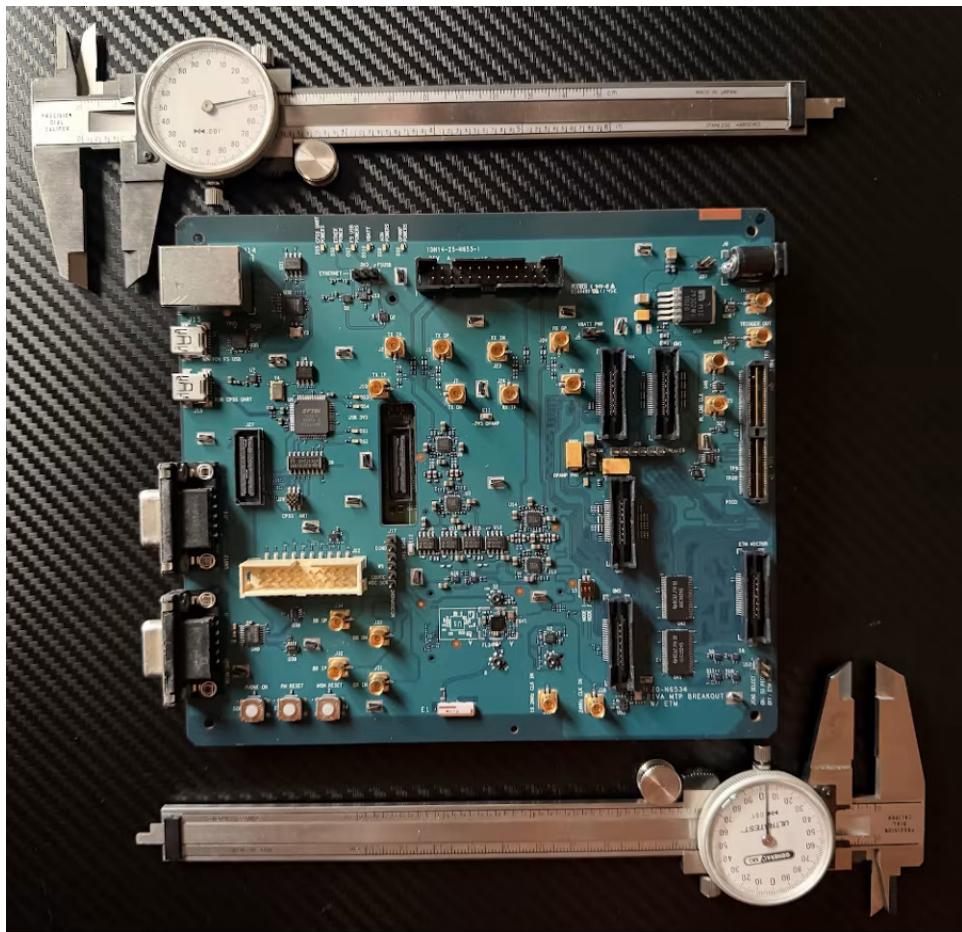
Dial calipers are essential for accurately measuring features on a PCB. Measuring outer or inner edges including hole sizes is possible using one end of the jaws or the other. Depth measurements use the other end of the calipers. (Source: Author)
